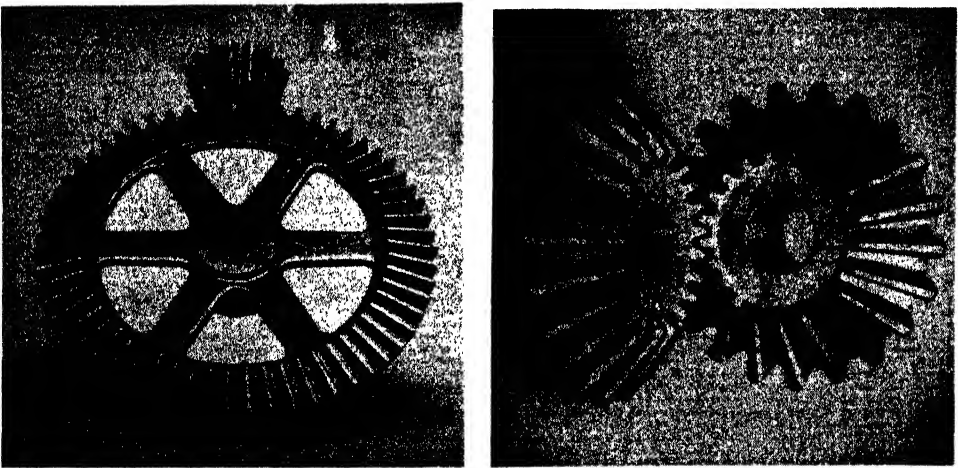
BEVEL OR MITER GEARS. (Courtesy W. A. Jones Foundry and Machine Co.)
